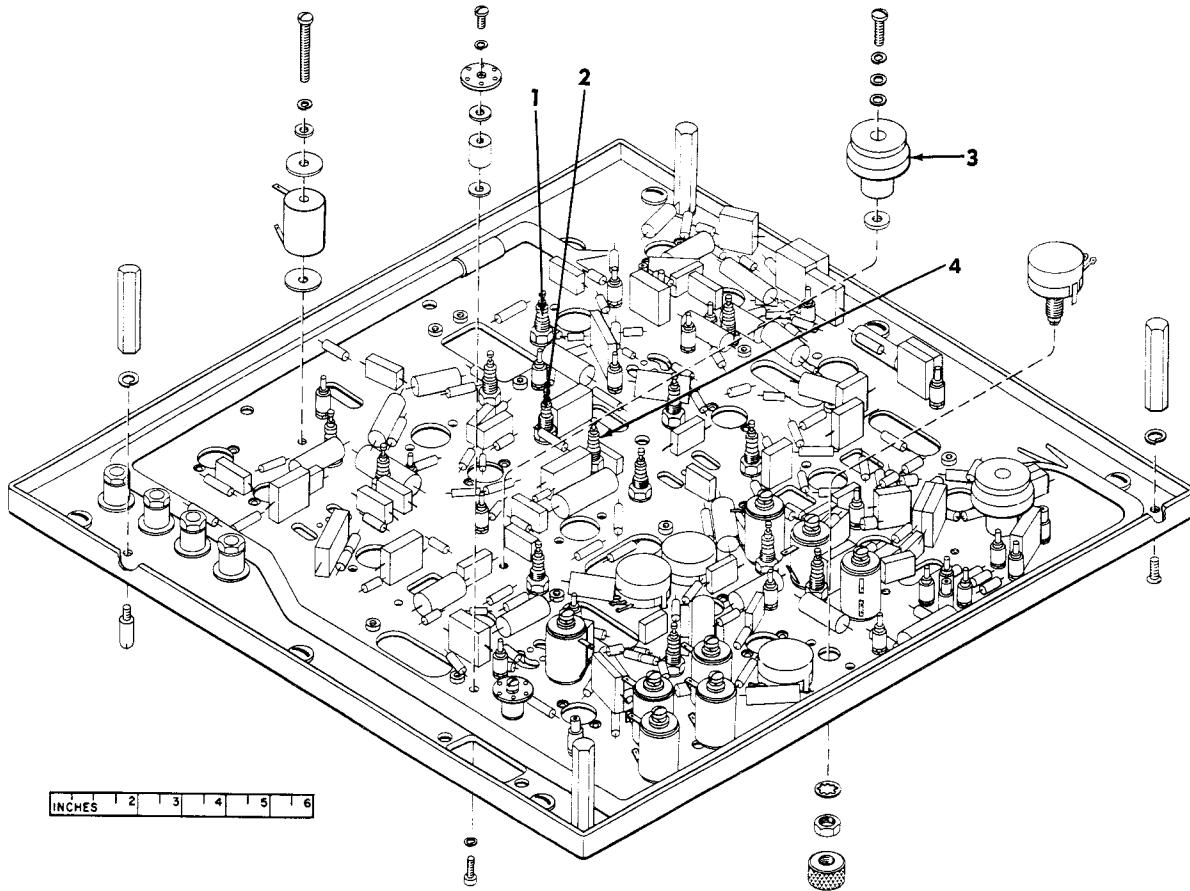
Coder, radar, guided missile (8159347) - partial exploded view
